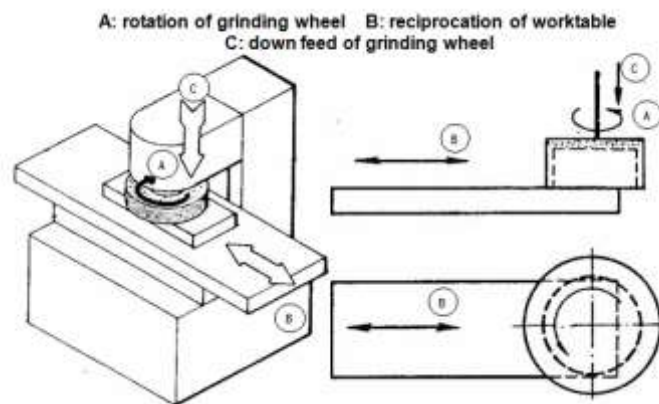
Vertical spindle reciprocating table surface grinder Fig. 29.4 Surface grinding in Vertical spindle reciprocating table surface grinder
